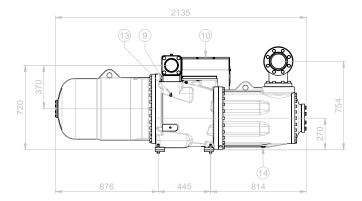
dimensional drawing of the models: ES3-L160/L180/L210/L220
